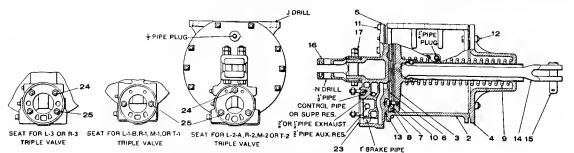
Traction Brake Cylinder, Type R. Westinghouse Air Brake Company.
